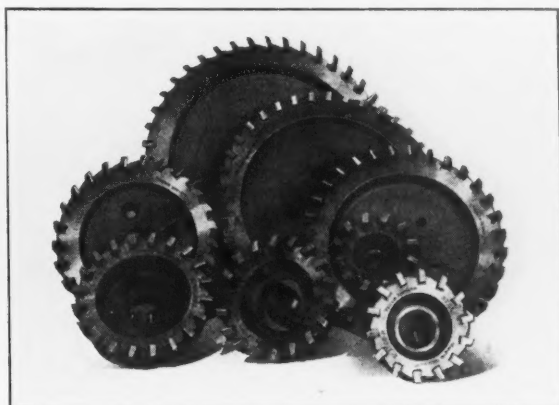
"Positive-Lock" Face Milling Cutters from 5 to 16 Inches in Diameter
